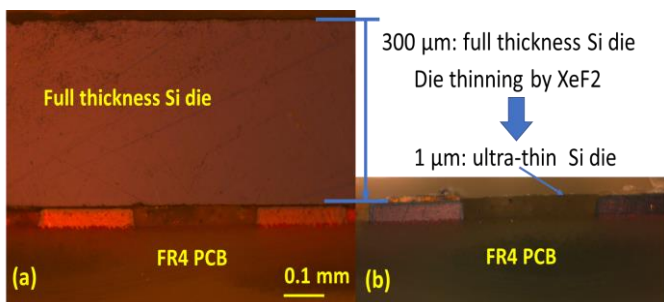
Cross-sectional view on ACF FC bonded samples on FR4 PCB: full thickness Si die (a) and ultra-thinned Si die (b).
